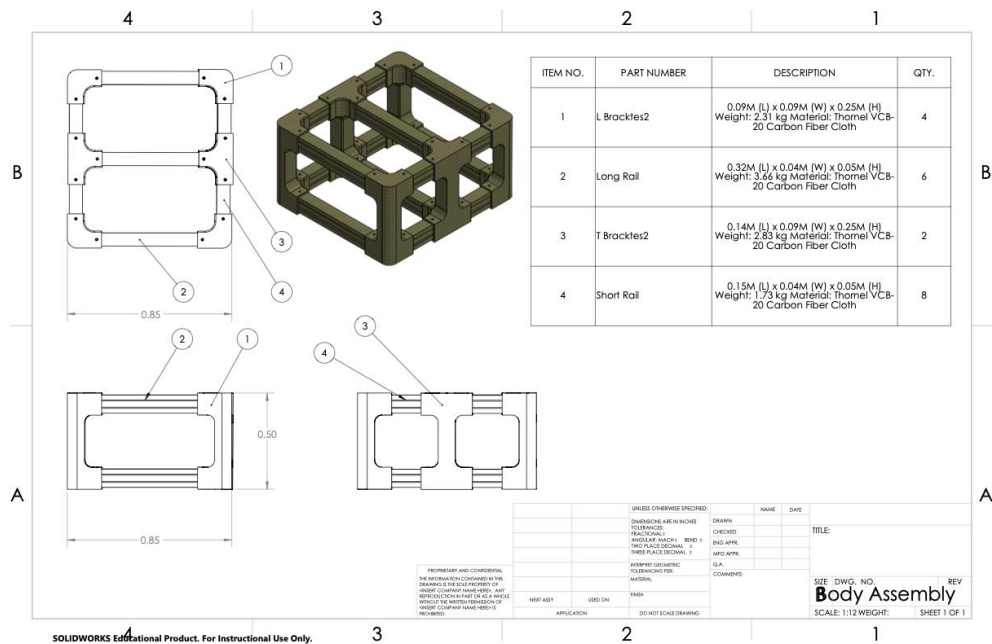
Solidworks CAD 3D Rover body assembled parts & measurements
